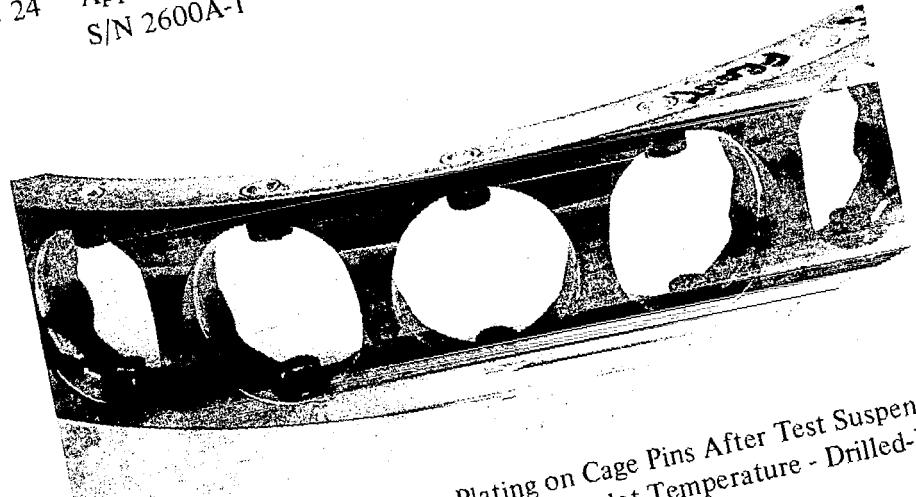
Appearance of Worn Silver Plating on Cage Pins After Test Suspension at 2.8
